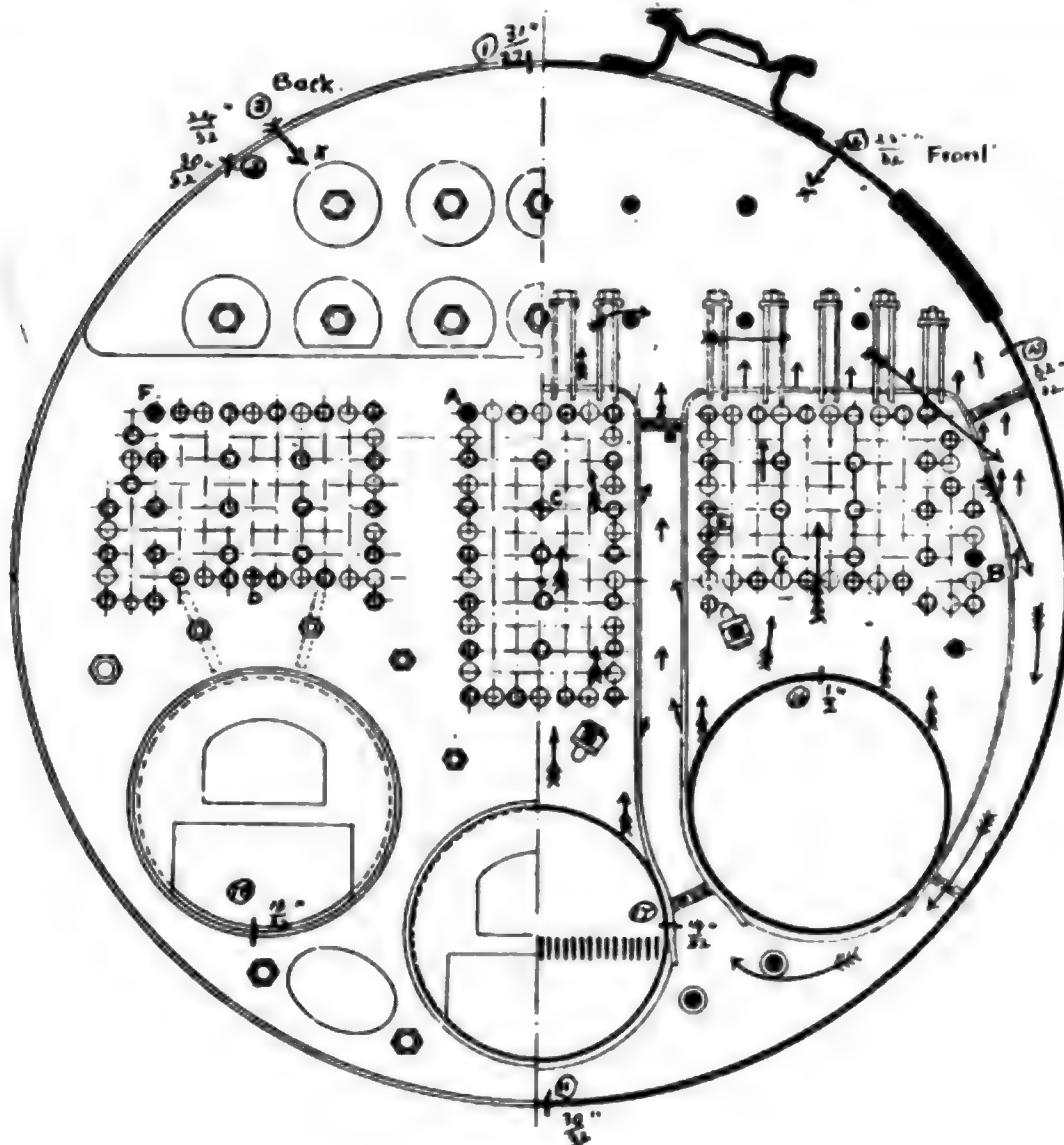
CYLINDRICAL RETURN TUBE BOILER.
